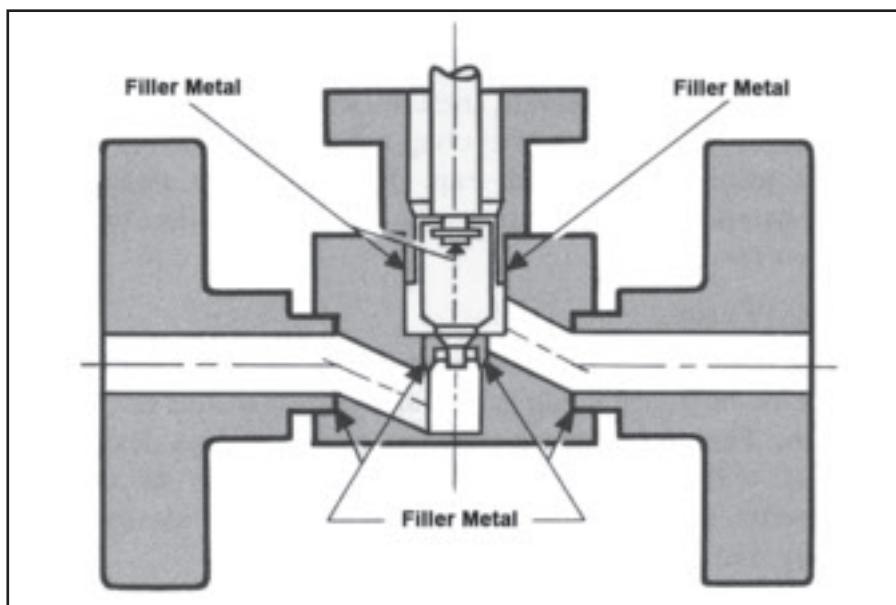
Sketch of a braze-welded valve for cryogenic service.
